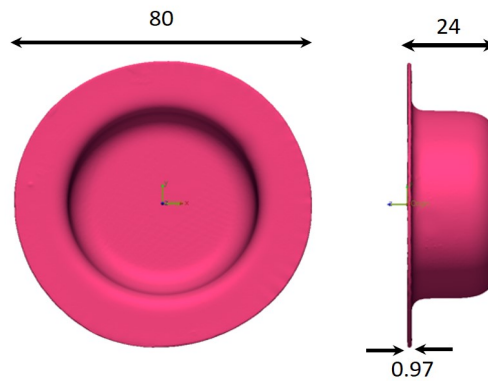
Top and side views of the cylindrical cup (All dimensions are in mm).
